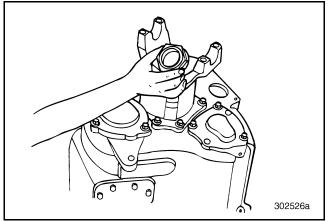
Installing Drive Yoke and Nut (T313L21/T318L21 Shown)
